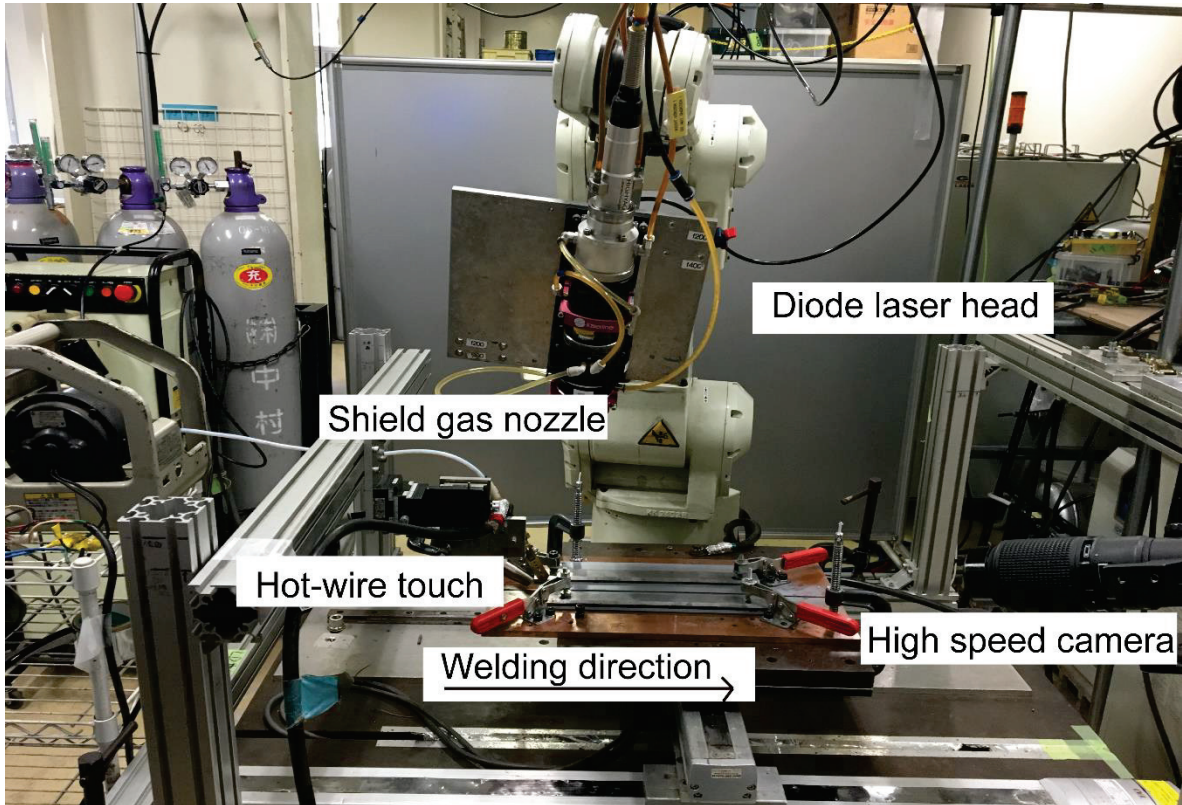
Experimental set-up for Hot-wire Laser welding
